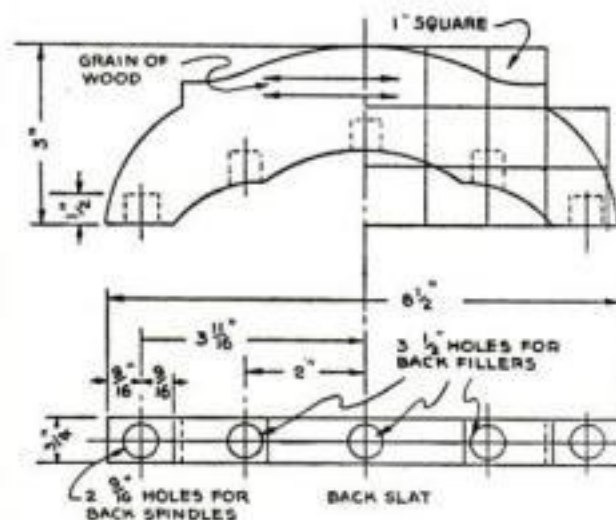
Face and underedge of the back slat. Bore the holes; then do the sawing.
